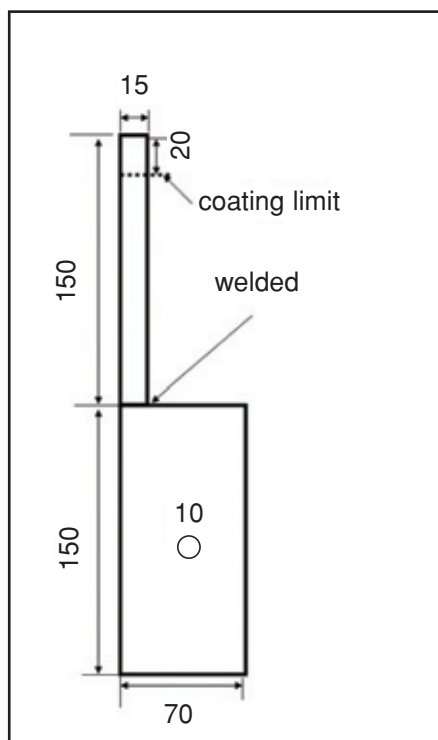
Specimen design for the cathodic disbonding tests; dimensions in mm
